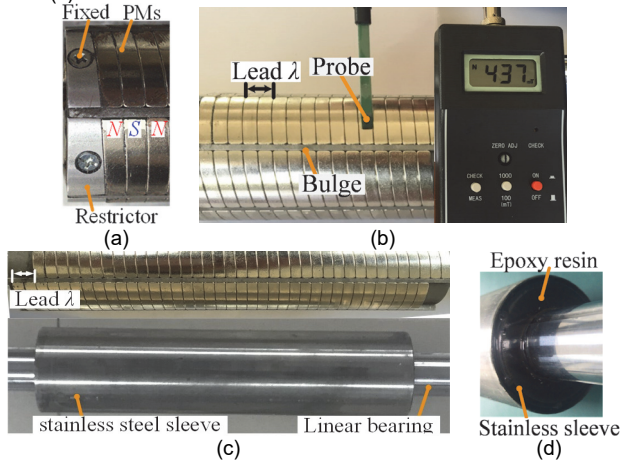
Helical magnetic pole manufactured. (a) Axial restrictors. (b) Remanence test. (c) Stainless steel sleeve. (d) Epoxy resin.
